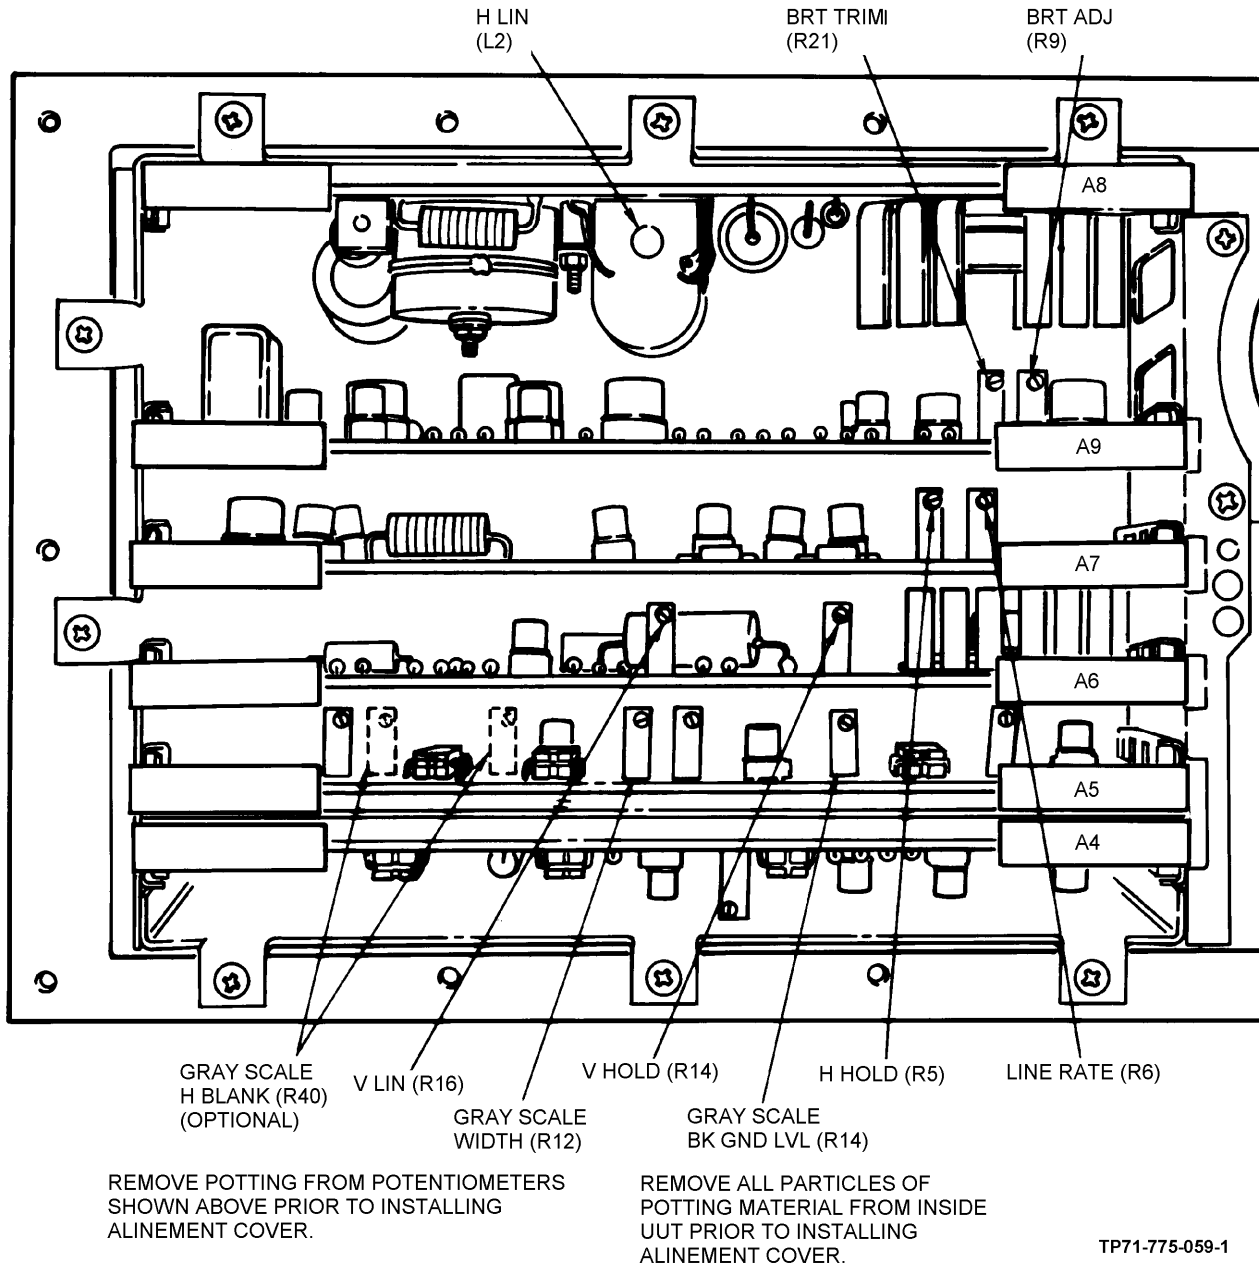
IVD Electronics Assembly Adjustment Component Locations (Bottom) (Internal HDD Calibration)
